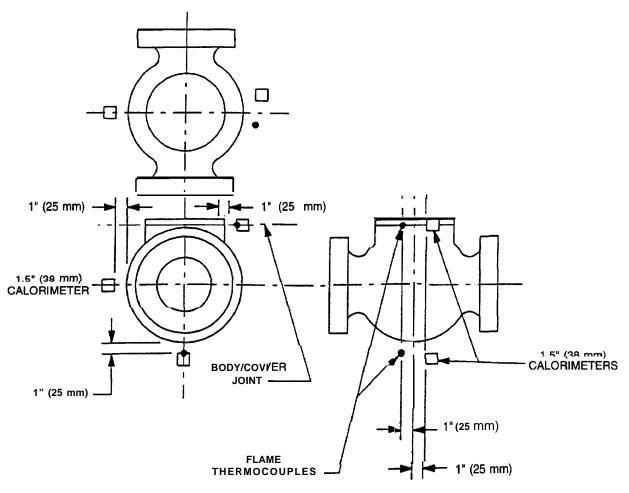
Location of Thermocouples and Calorimeters-Larger Flanged Check Valves
